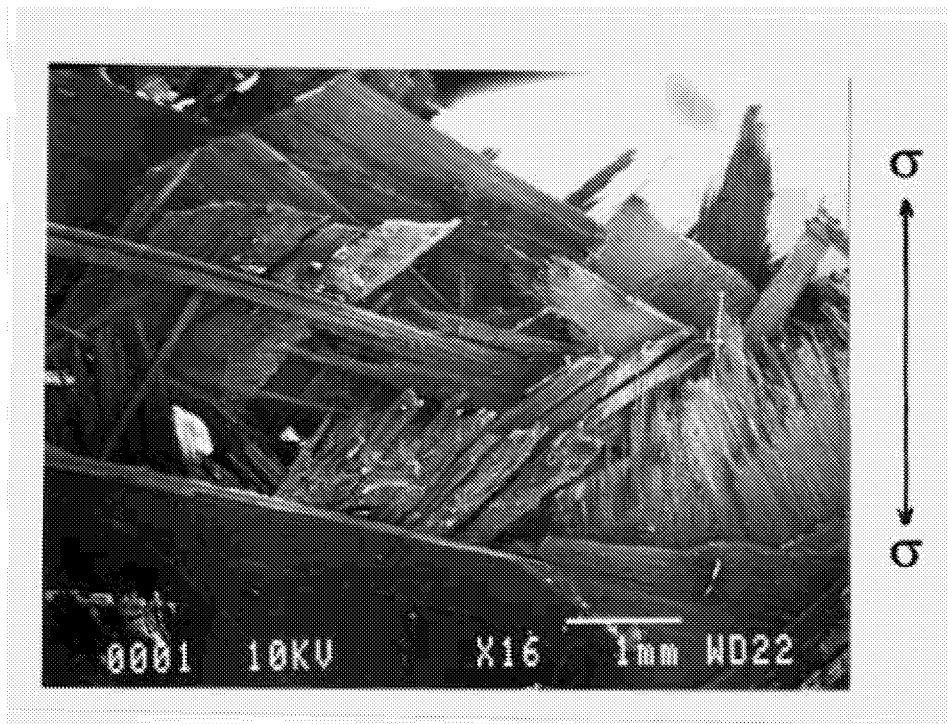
Typical fracture surface of T650-35/PMR-15 SMC revealing extensive fiber and fiber bundle pull-out.
